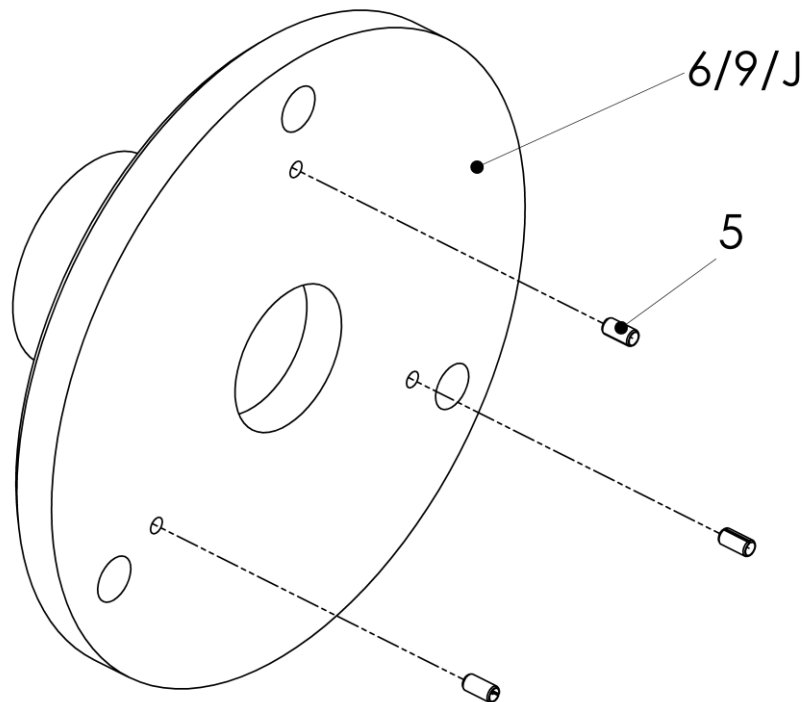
Preparing the hub/adapter/customer part (6/9/J) for mounting
